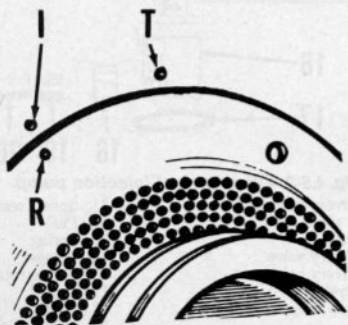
View of timing marks located on air shroud. Refer to text for injection timing.
